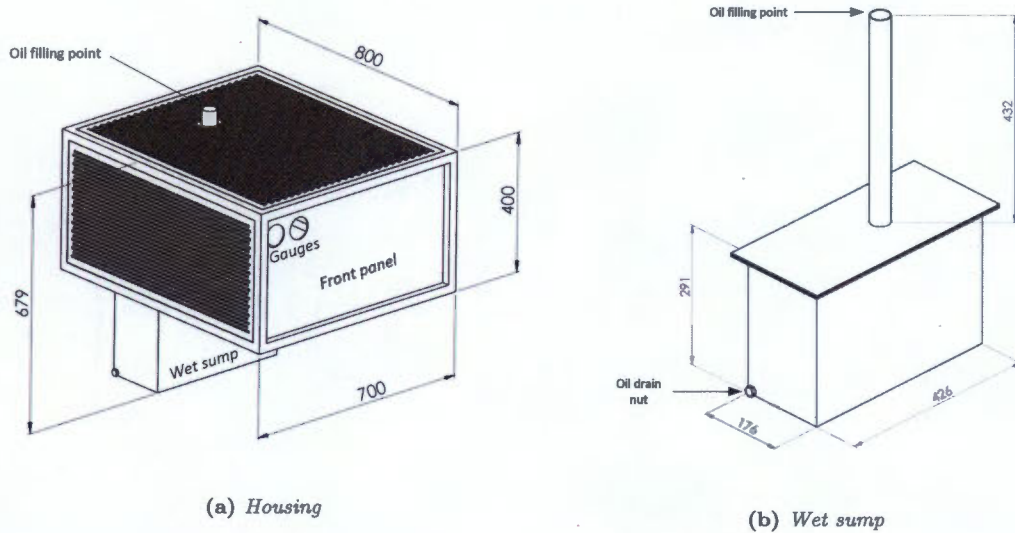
Three-dimensional representation of the conditioning unit housing (a) and wet sump (b) assembly.
